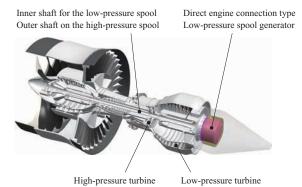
Concept for the Engine Embedded Electric Machine (E3M)
